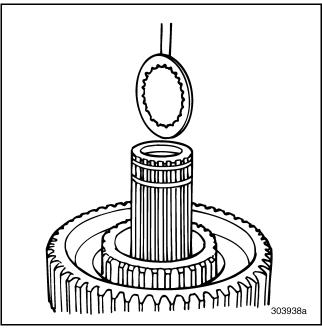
Removing Hub Thrust Washer (T313L/T318L Shown)
